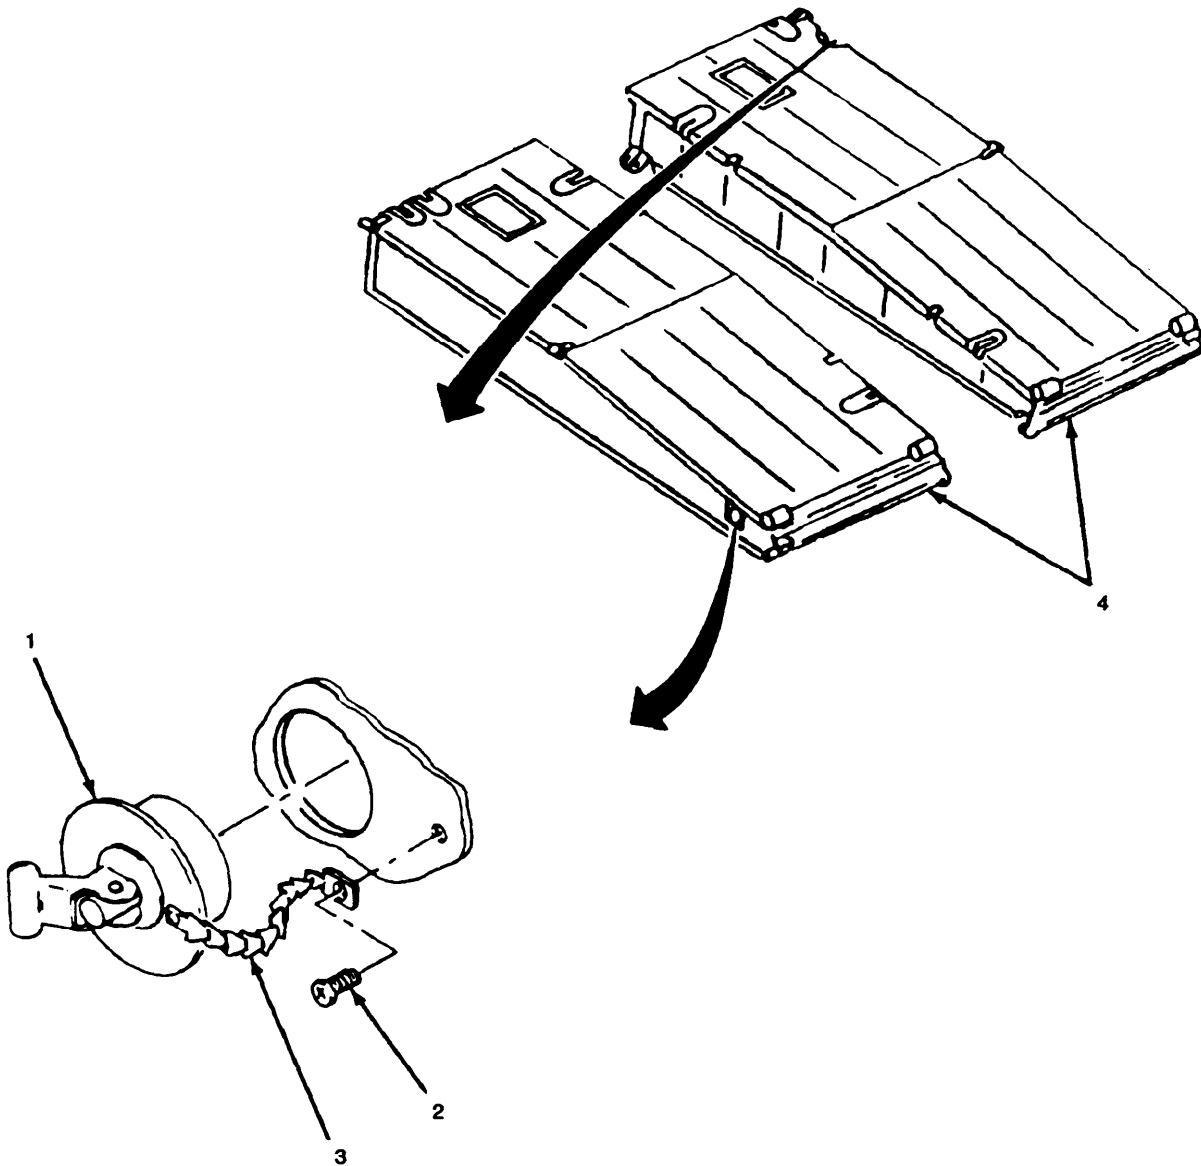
Ramp Bay Roadway Pontons, Repair.
